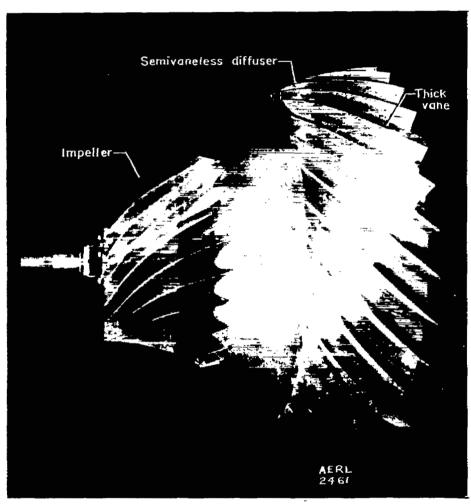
Mixed-flow impeller and semivaneless diffuser with impeller and diffuser front shroud removed.
